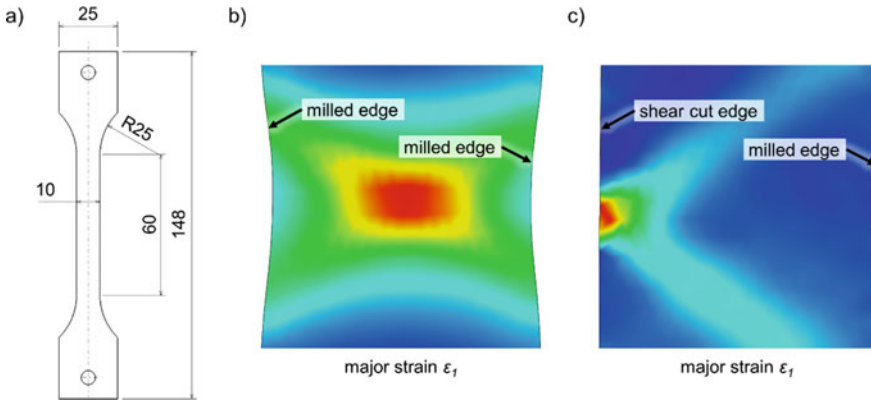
a Geometry of an *EFTT* sample; b start of necking in the center for a both-sided milled specimen; c start of necking at the edge for a half-sided shear cut specimen
